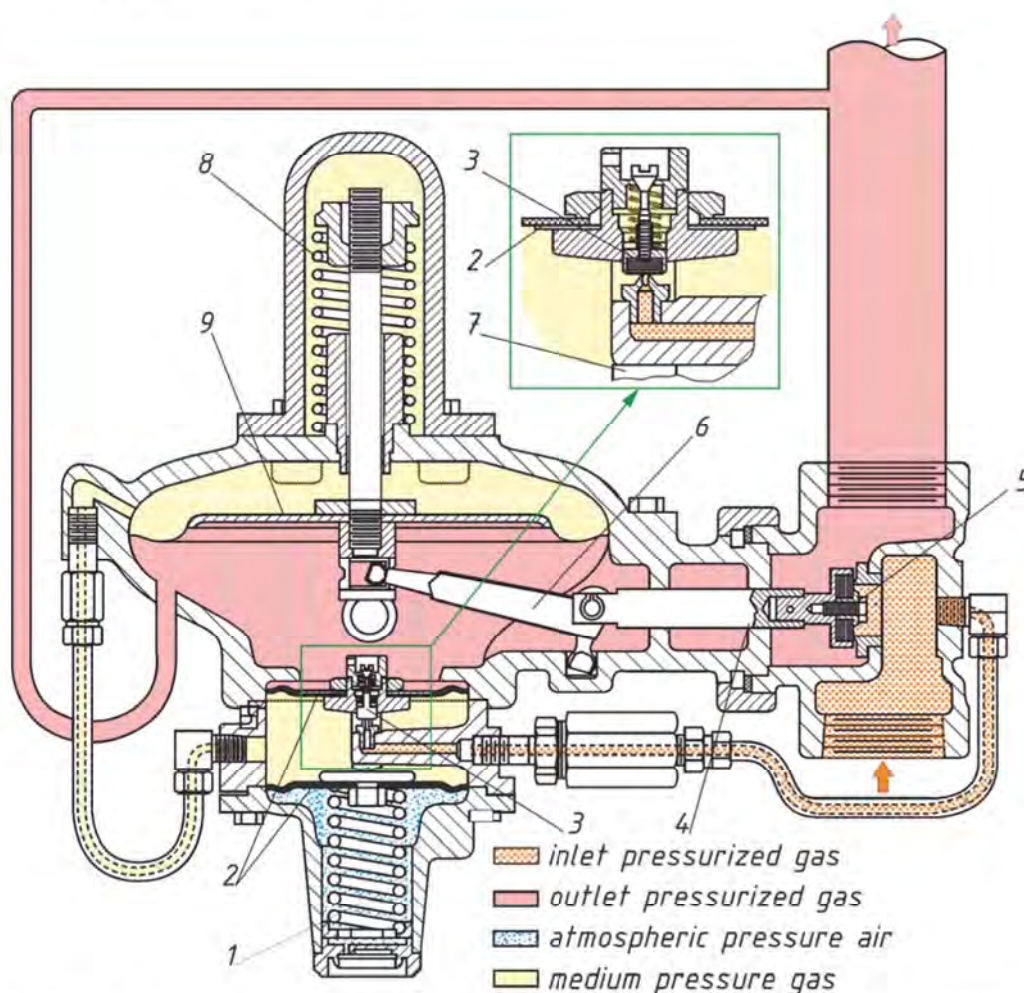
Design and operating diagram of a dual gas reducer for a Caterpillar G 3600 series engine: 1 – operating pressure reducer spring; 2 – working pressure reducer diaphragms; 3 – double valve of the working pressure reducer; 4 – drive rod of the outlet pressure adjustment valve; 5 – outlet pressure adjustment valve; 6 – drive lever for the outlet pressure adjustment valve; 7 – intermediate stop of the operating pressure reducer valve drive; 8 – outlet pressure reducer spring; 9 – output pressure reducer diaphragm (adapted from [86])
